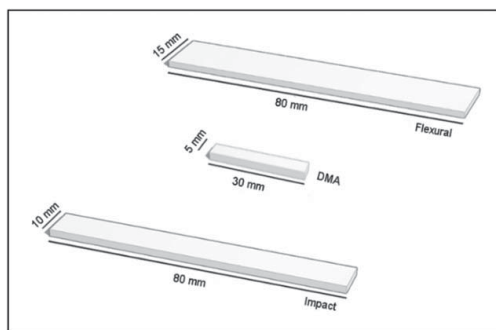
Dimensions of 3-point bending, DMA, and impact test specimens.
